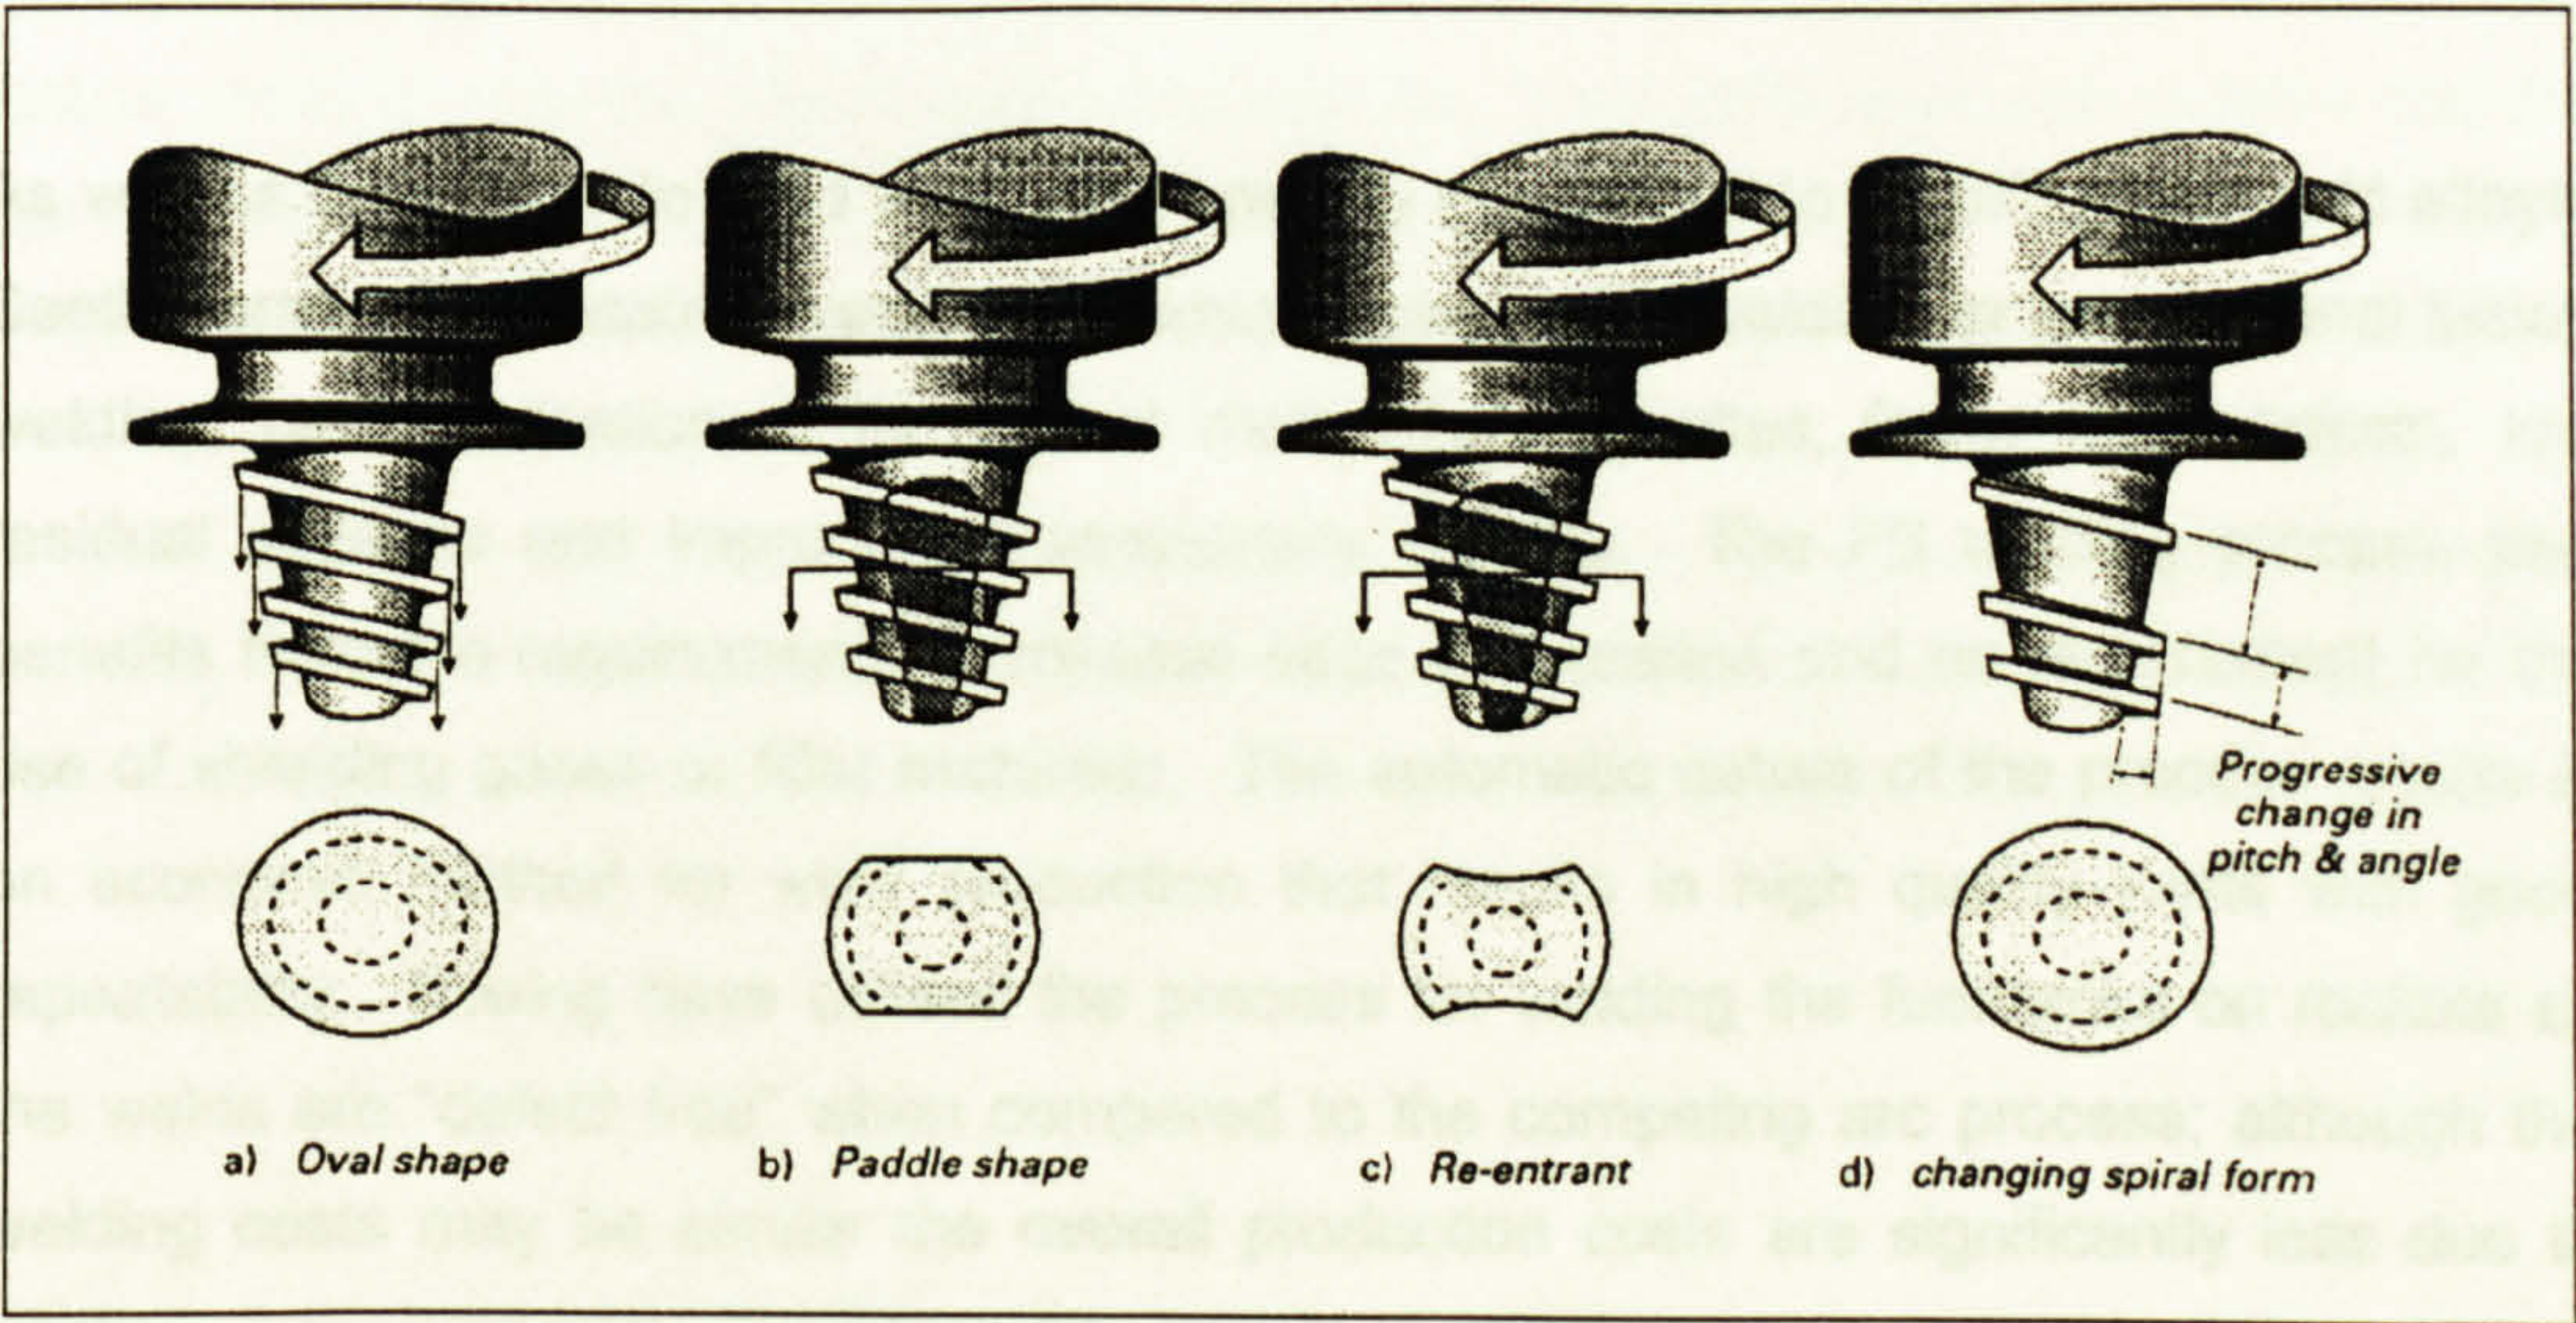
Whorl™ friction stir welding tool profiles²
